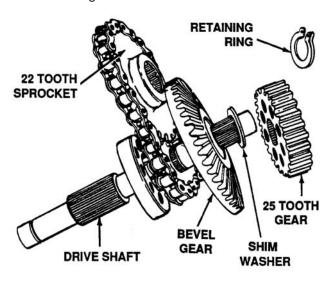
Removal of 25 Tooth Gear and Shim Washer
